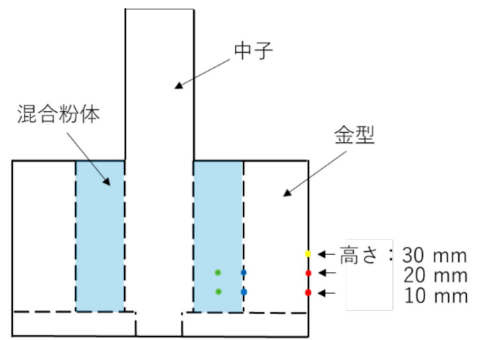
Cross sectional view of ceramic powder and mold, indicating positions of thermocouple for temperature measurement.
